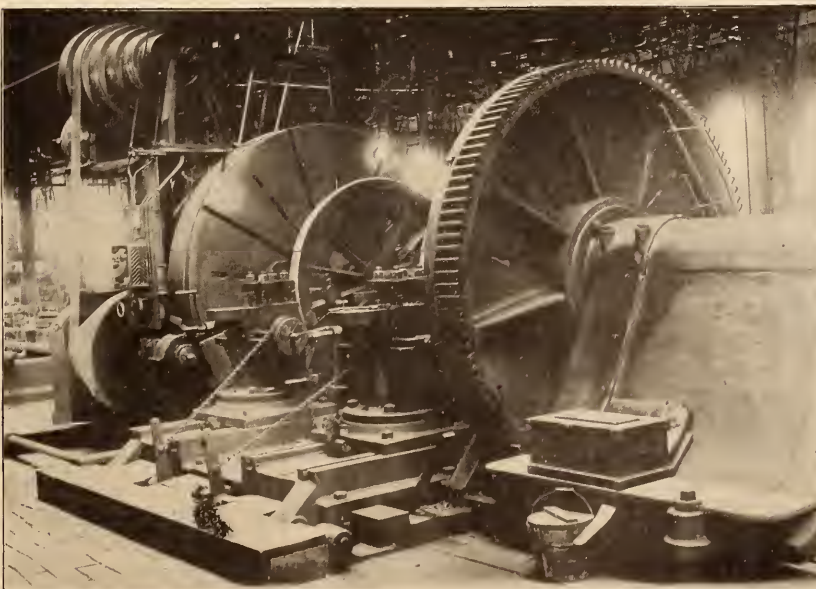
HEAVY 100-INCH WHEEL LATHE, C. M. & ST. P. RY.
